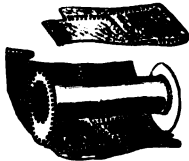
Explosion of a Cornish boiler from external corrosion.
